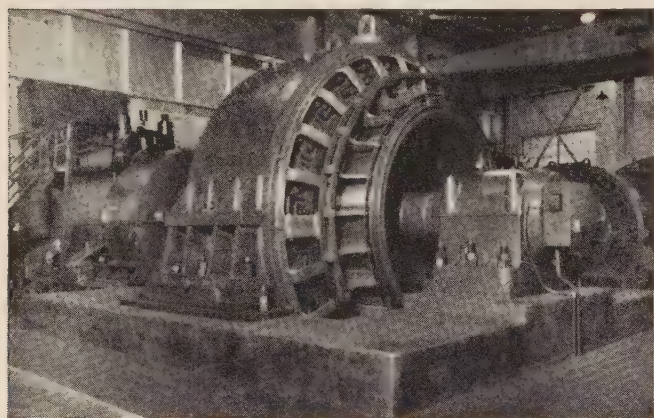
A 7000-HP. D-C. REVERSING MILL INSTALLED AT THE YOUNGSTOWN SHEET AND TUBE COMPANY
